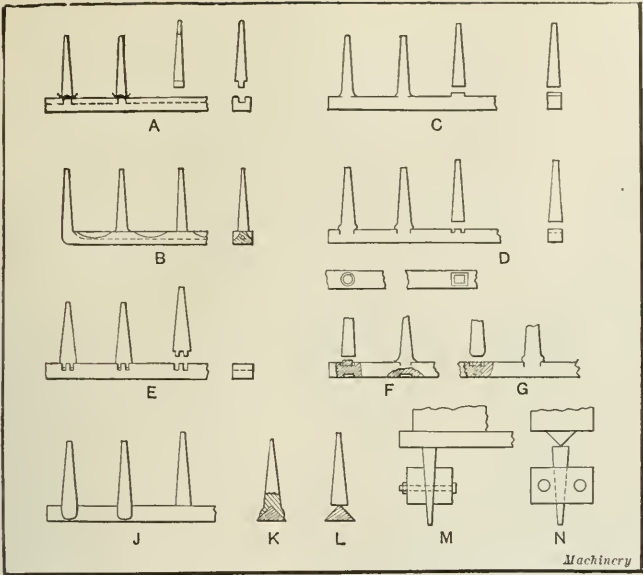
Diagram illustrating Principles used in employing Process known as "T-welding" with Special Application to the Manufacture of Garden Rakes
